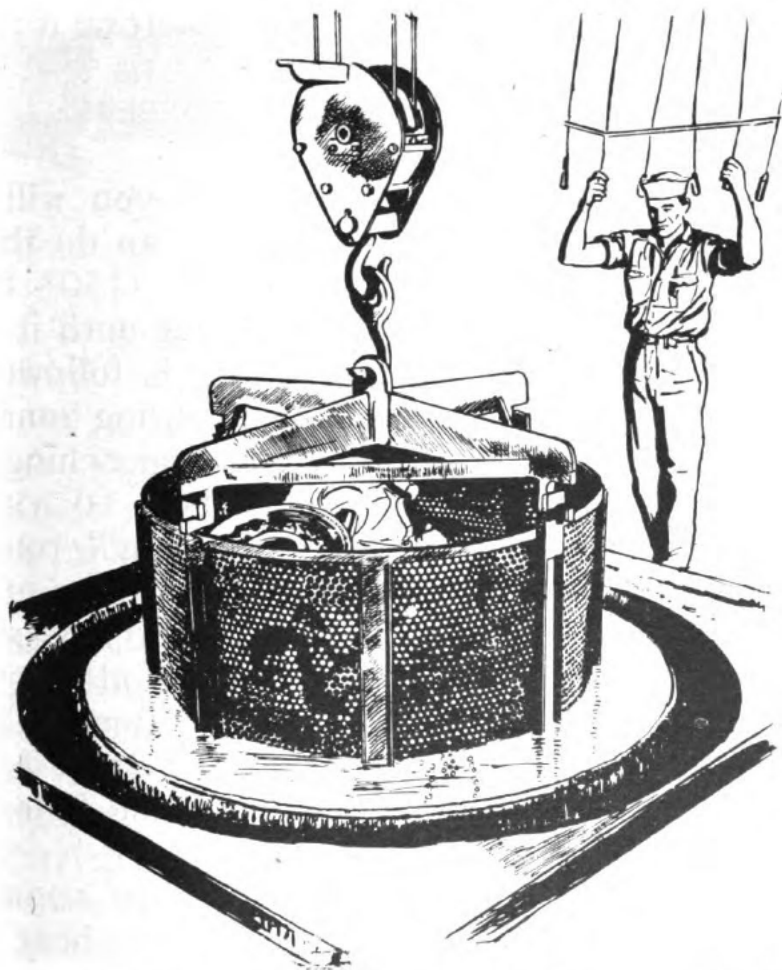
Lowering aluminum forgings into quenching tank after heat treatment.
